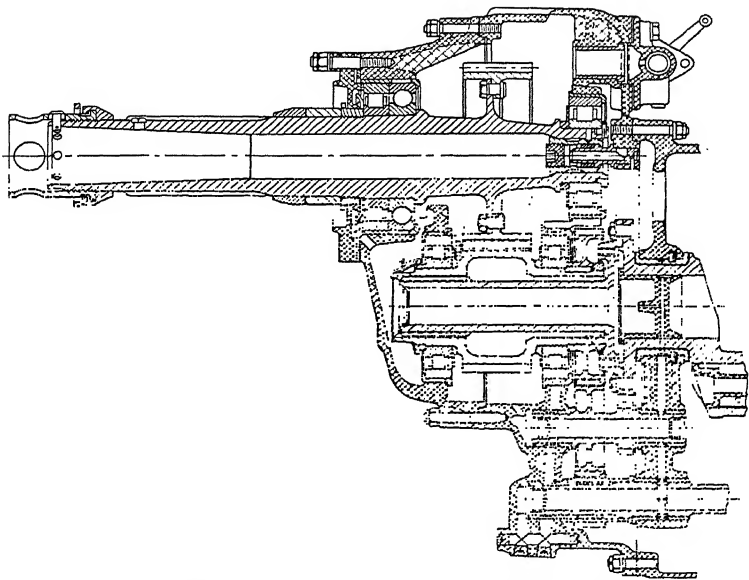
Single reduction gear used on geared models of ranger inverted V-12 engine. Gears are of the herringbone type.
